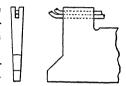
Armsture Winding Connected Directly to Commutator Bar
